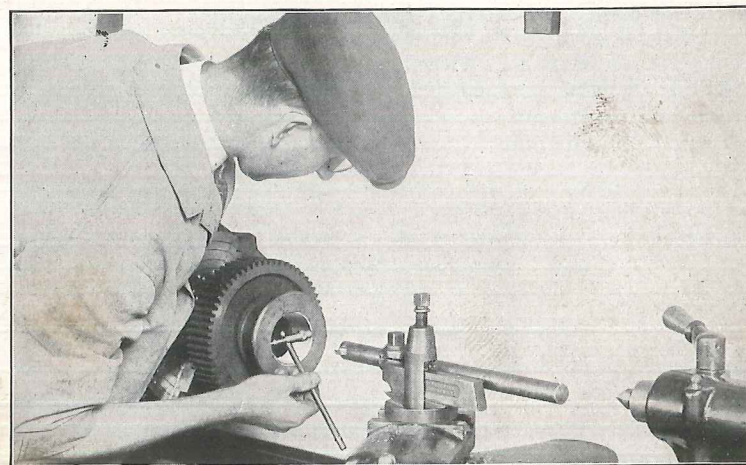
Using an Internal Micrometer Caliper Measuring the Diameter of a Machined Hole
